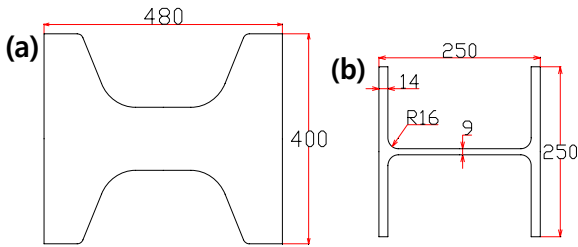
Beam blank dimension (a) initial beam blank (b) final H-beam
